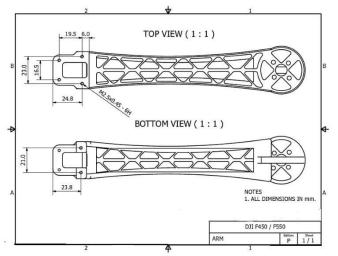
Hexacopter Arm structure with dimensions. (Top & Bottom view)
